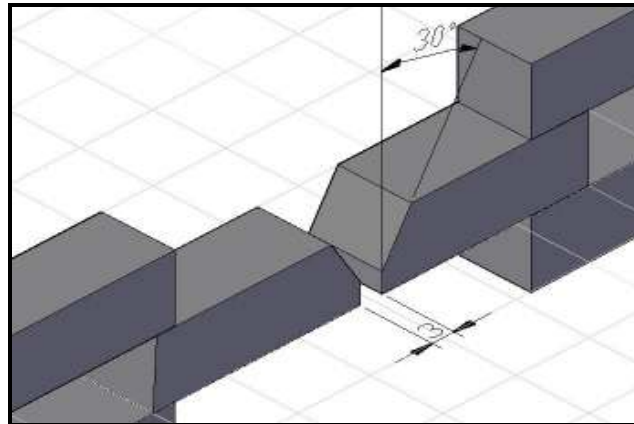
Preparation and fixing the two halves specimen to welding.
